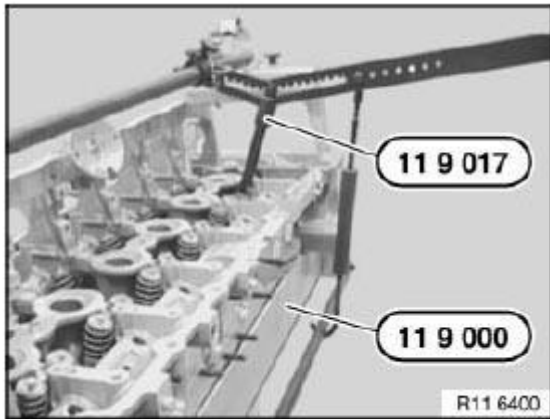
Identifying Special Tools (11 9 000 And 11 9 017)
